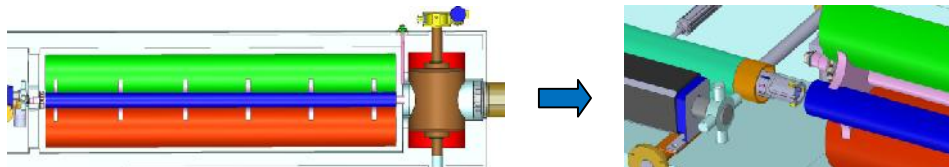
Representation of the storage tube assembly and the handling elements assembly positioning
